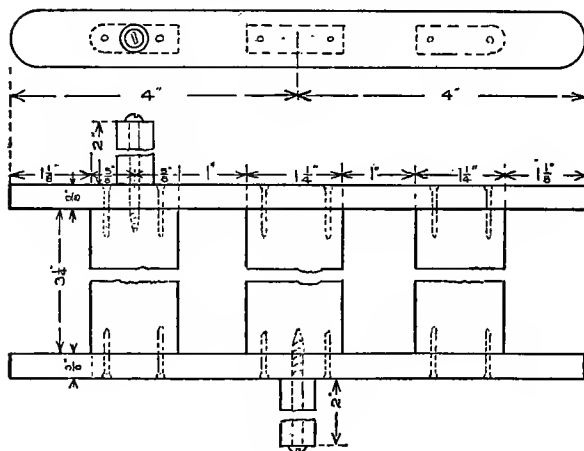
Assembly Drawing Showing How the Parts of String Reel Go Together
